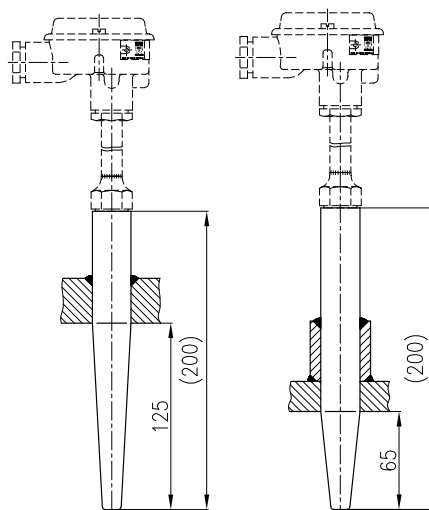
EXAMPLES OF WELDING OF THERMOWELL AND NIPPLES PURSUANT TO DIN 43 772
